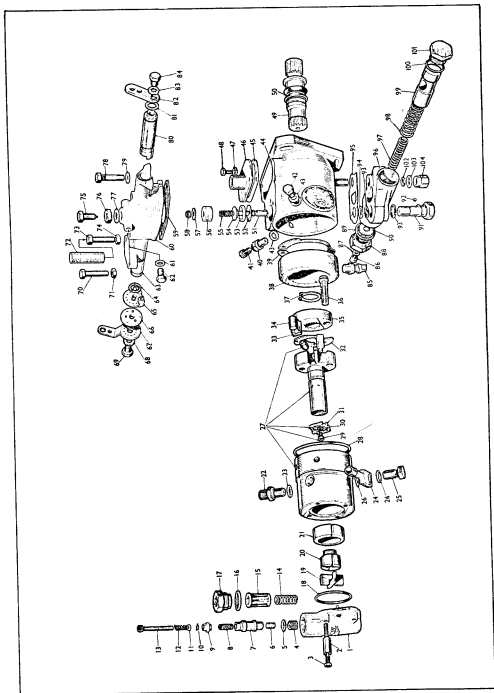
Fuel injection pump with hydraulic governor (Captain and 1.5)
